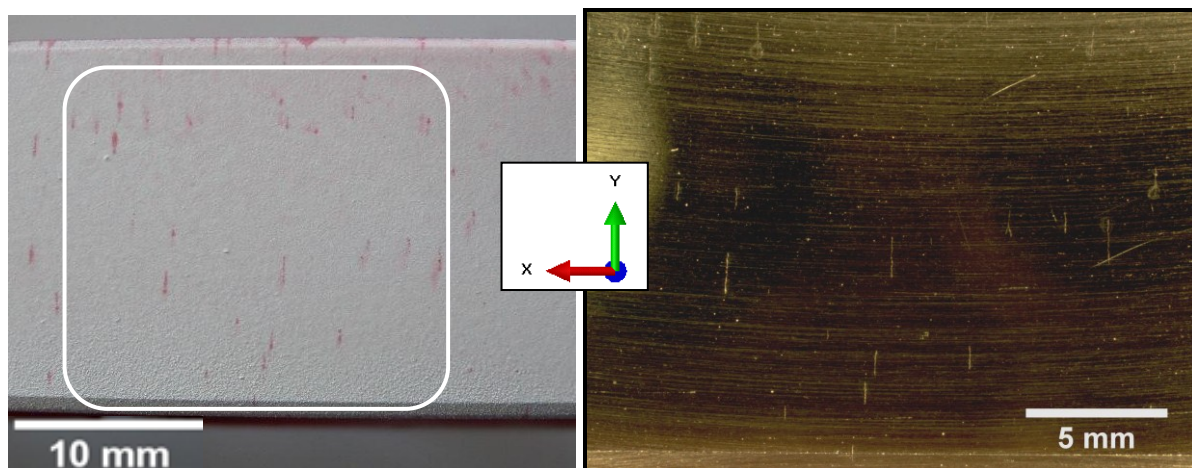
SSC cracks on the test face of fully-machined specimen P17 (PW, 5 °C, 35 mbar H₂S). Insert shows grinding lines from 600 grit SiC paper
